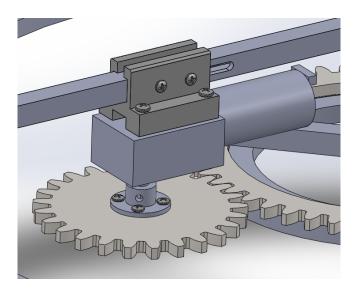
Added slots to the X-frame and a 3D printed motor mount to allow adjustability and ensure proper meshing of the gears.
